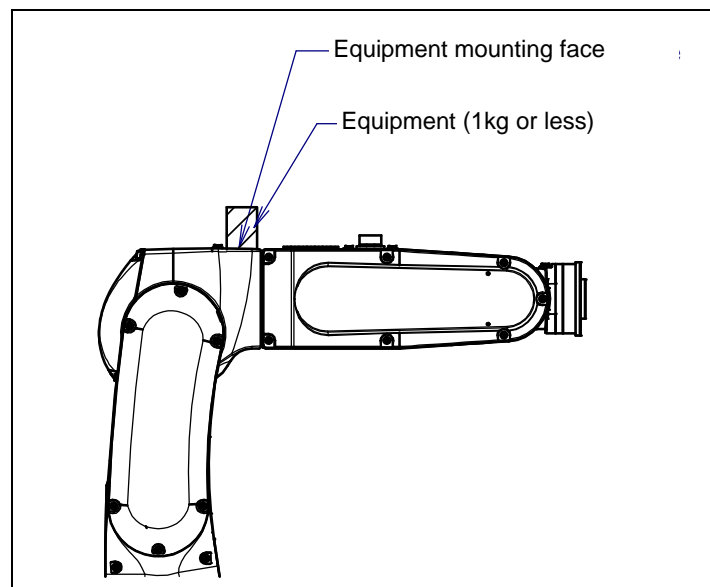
(b) Load condition of equipment mounting face (CR-7*i*A, CR-7*i*A/L, CR-14*i*A/L)
